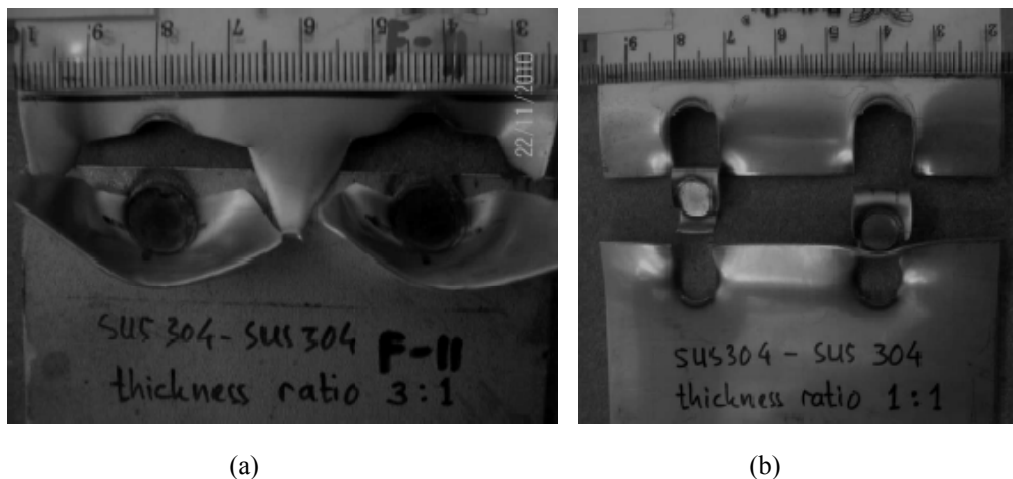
The fracture mode of fatigue test samples: (a) 3.0-1.0 mm joint (b) 1.0-1.0 mm joint
